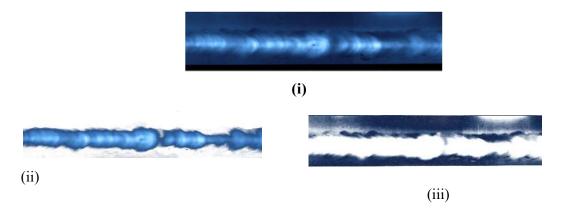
(i) Radiography film (ii) the weld inside cluster (iii) weld side cluster
